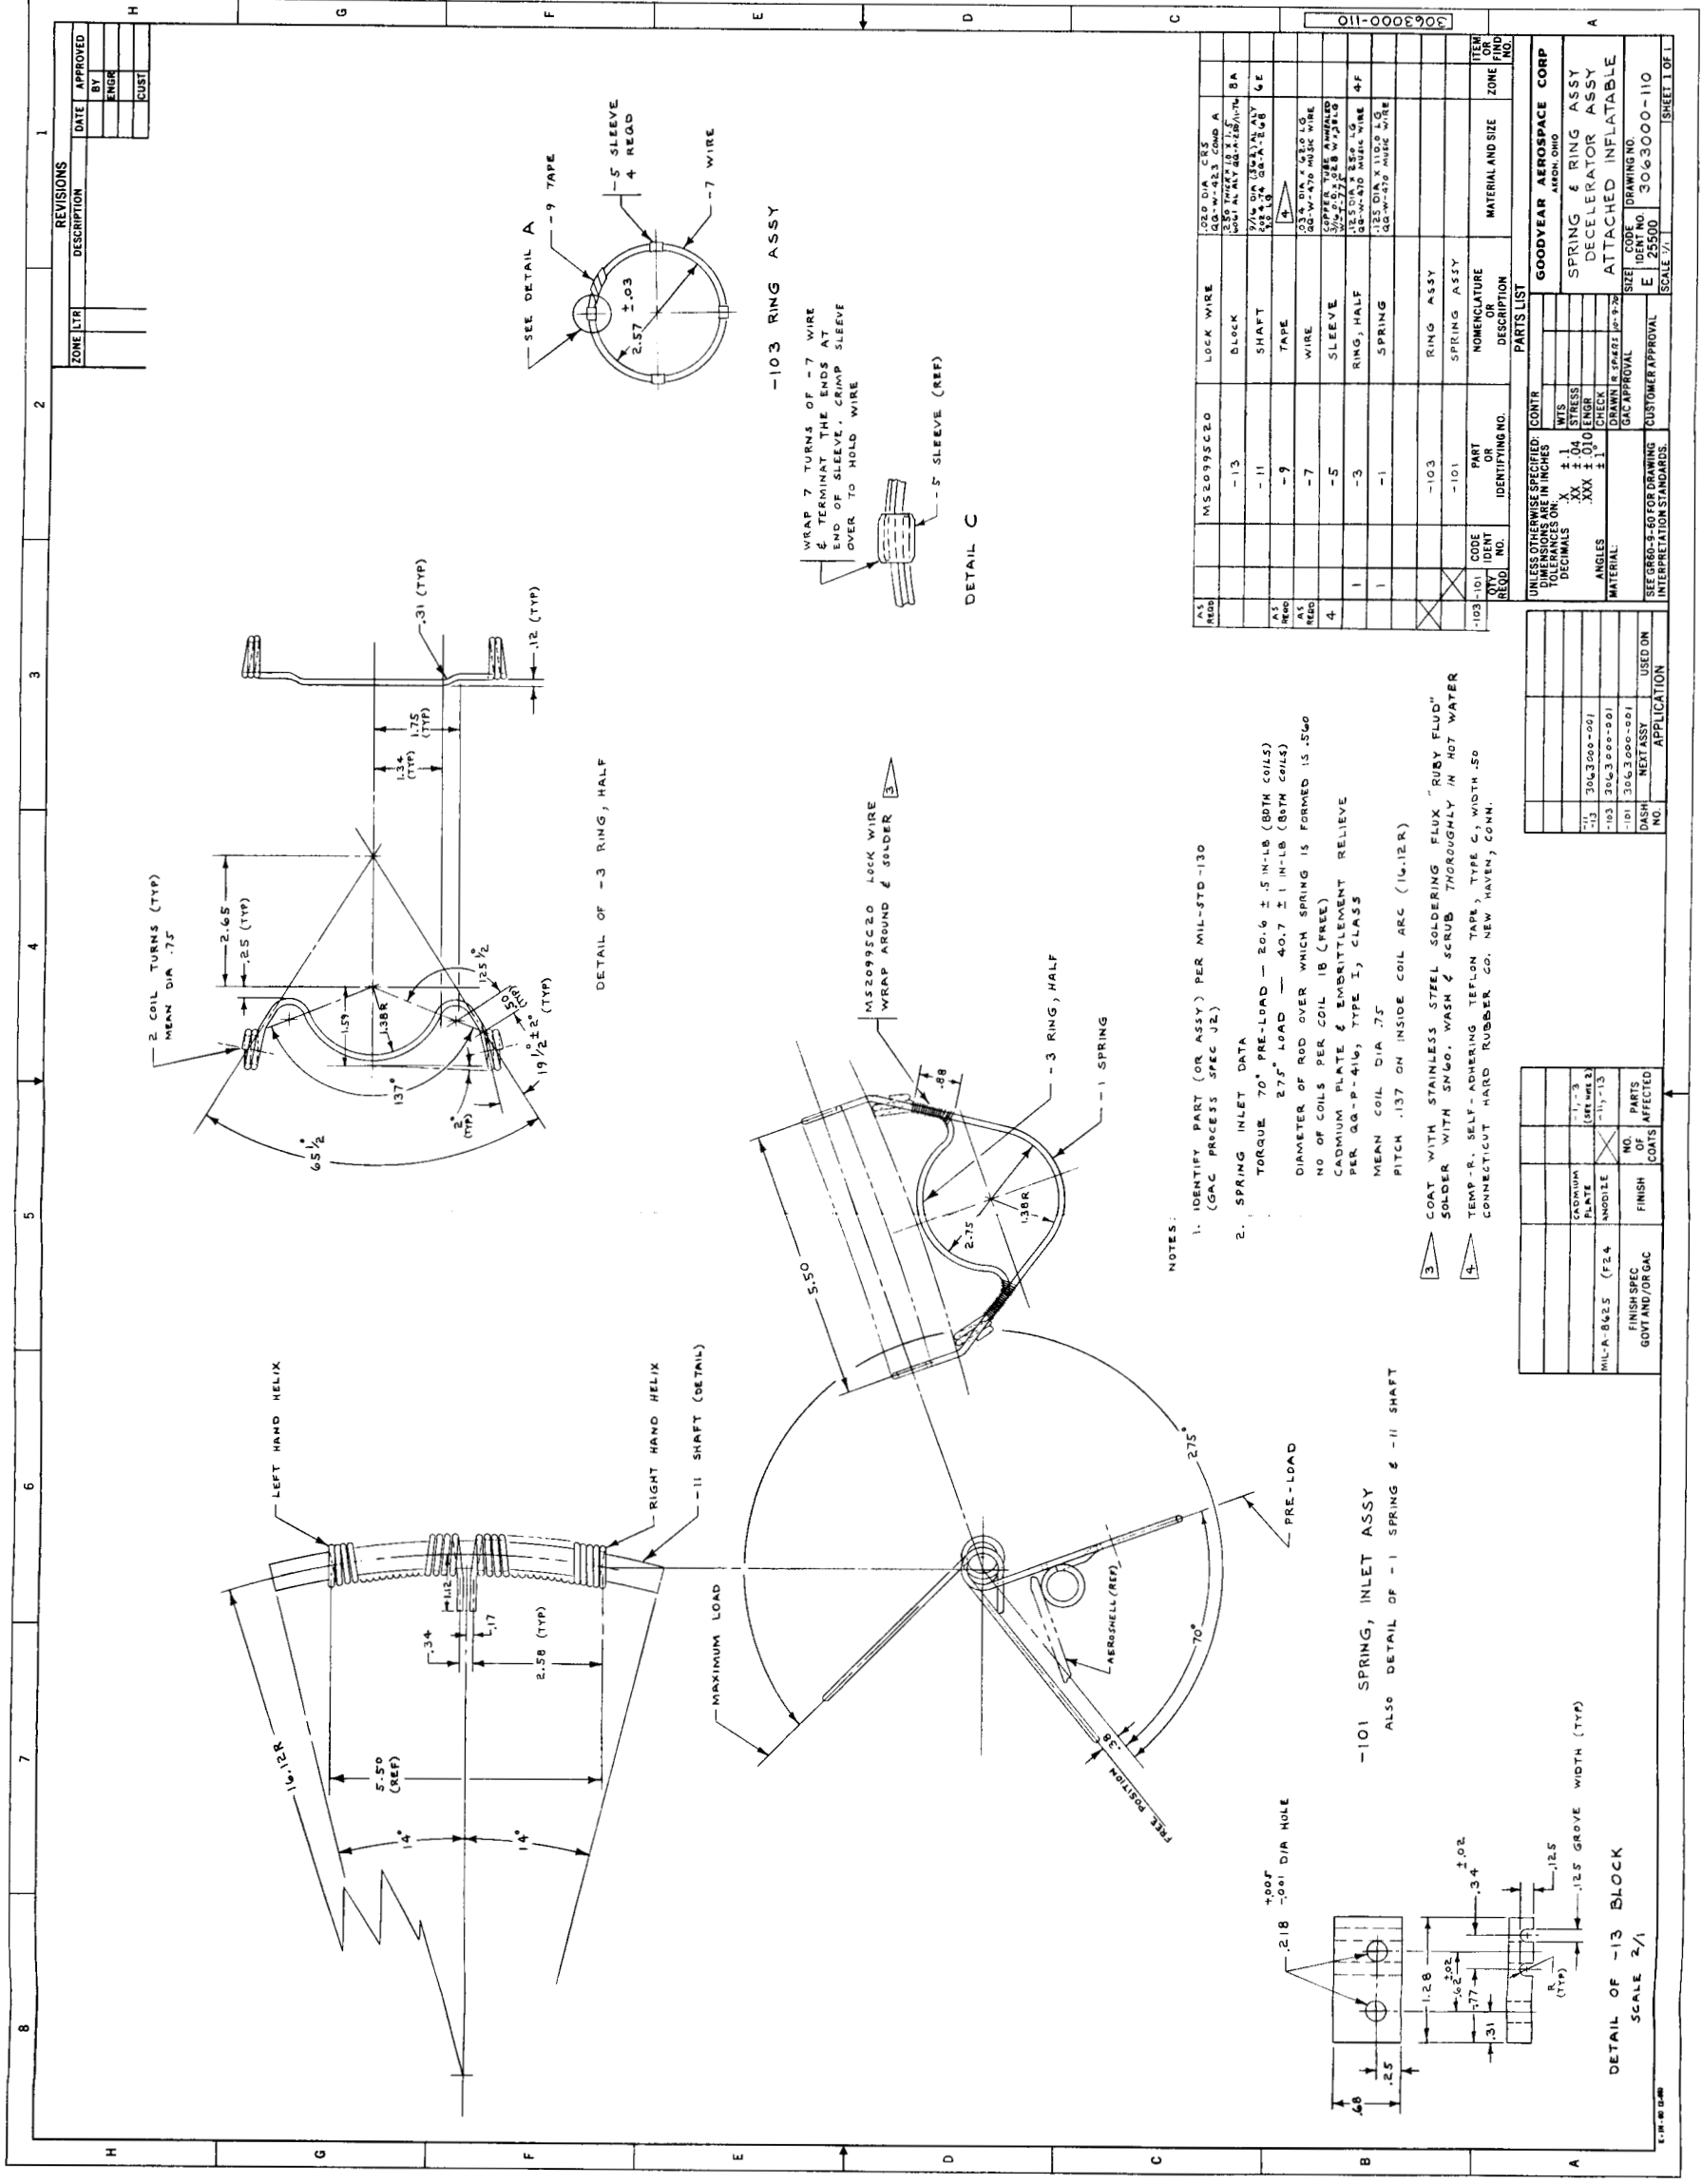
Spring and Ring Assembly, Attached Inflatable Decelerator Assembly, Drawing 3063000-110, Sheet 1
